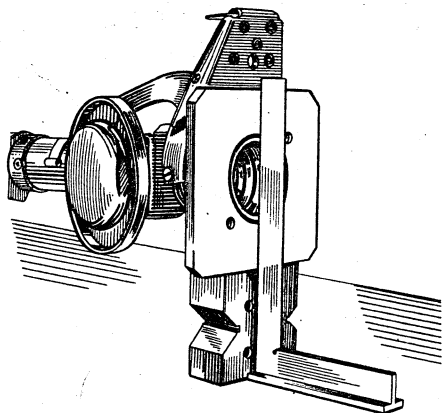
Checking the Rear Axle Beam for Horizontal Deformations with Angle Gauge Applied to Outer Face of Flange A.70172
